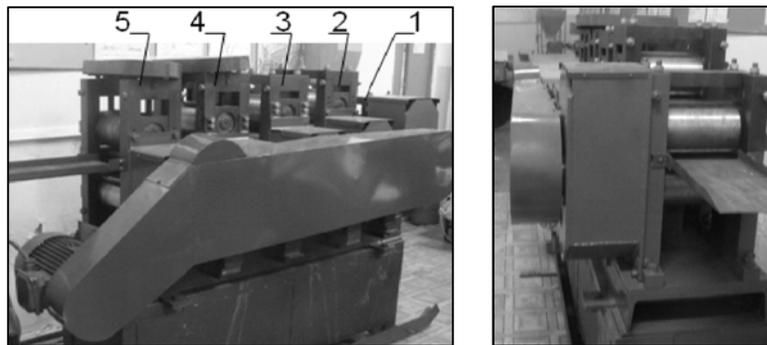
Rolling mill DUO with the corrugated rolls: 1-workpiece; 2-drag-over mill; 3-bottom roll
